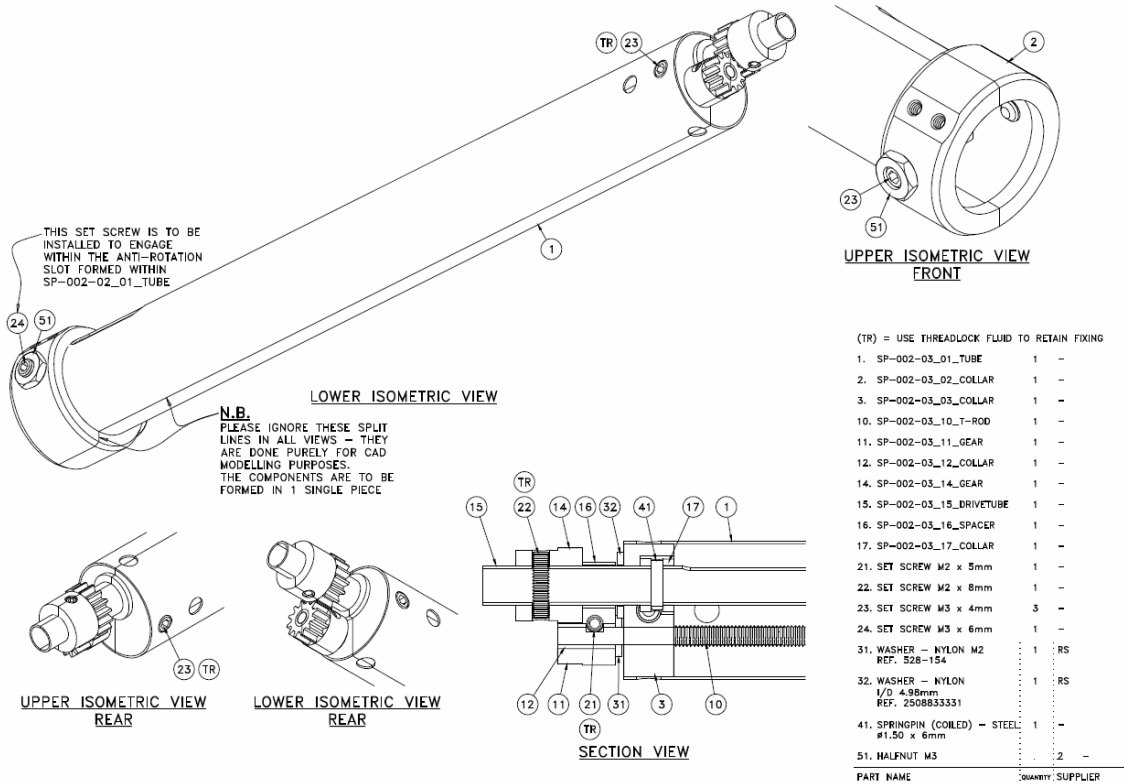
Detail drawings of the barrel part of the actuator with all parts that attached to it, which is connecting the barrel to the motor and the piston.
